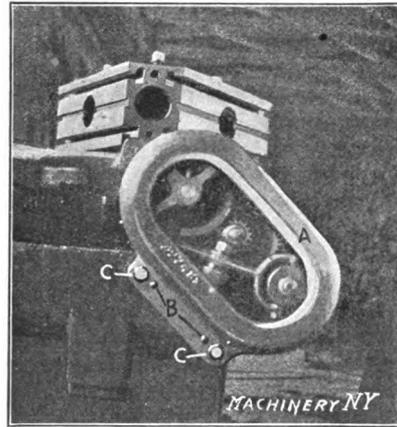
Assembled Turret Lathe Indexing Mechanism shown in Detail in Fig. 7
